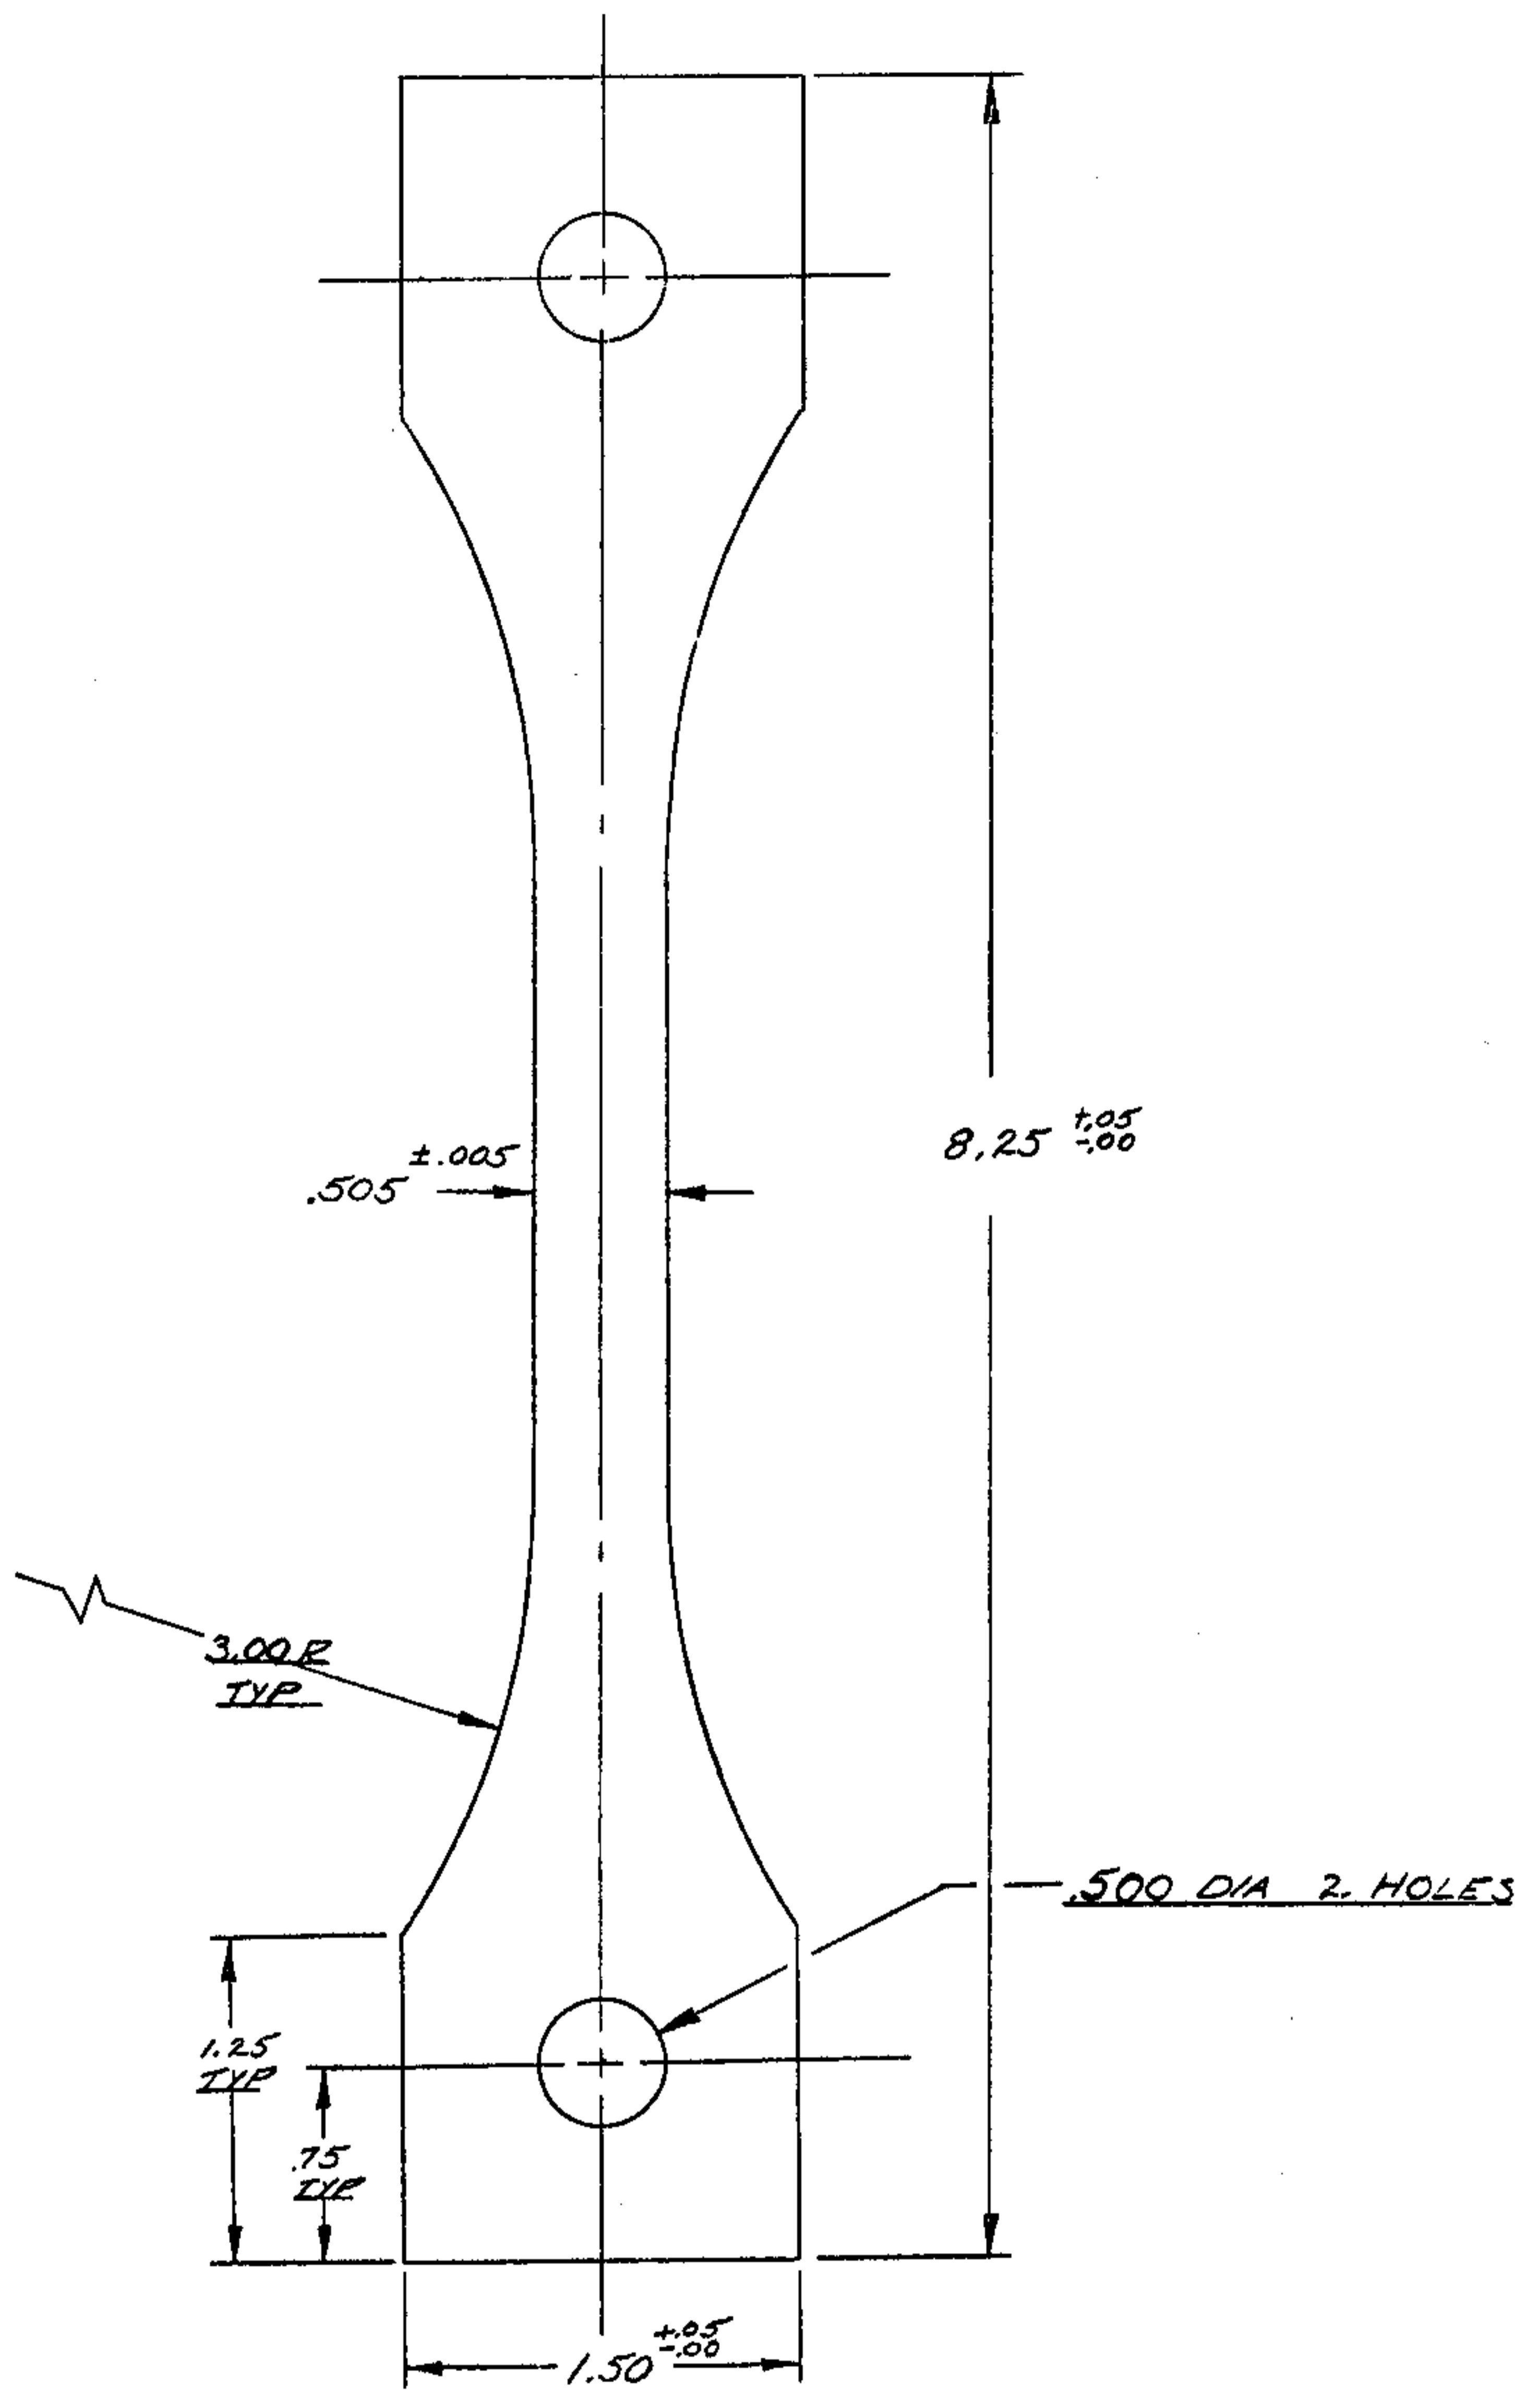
TENSILE TEST SPECIMEN (PIN JOINT TYPE)
